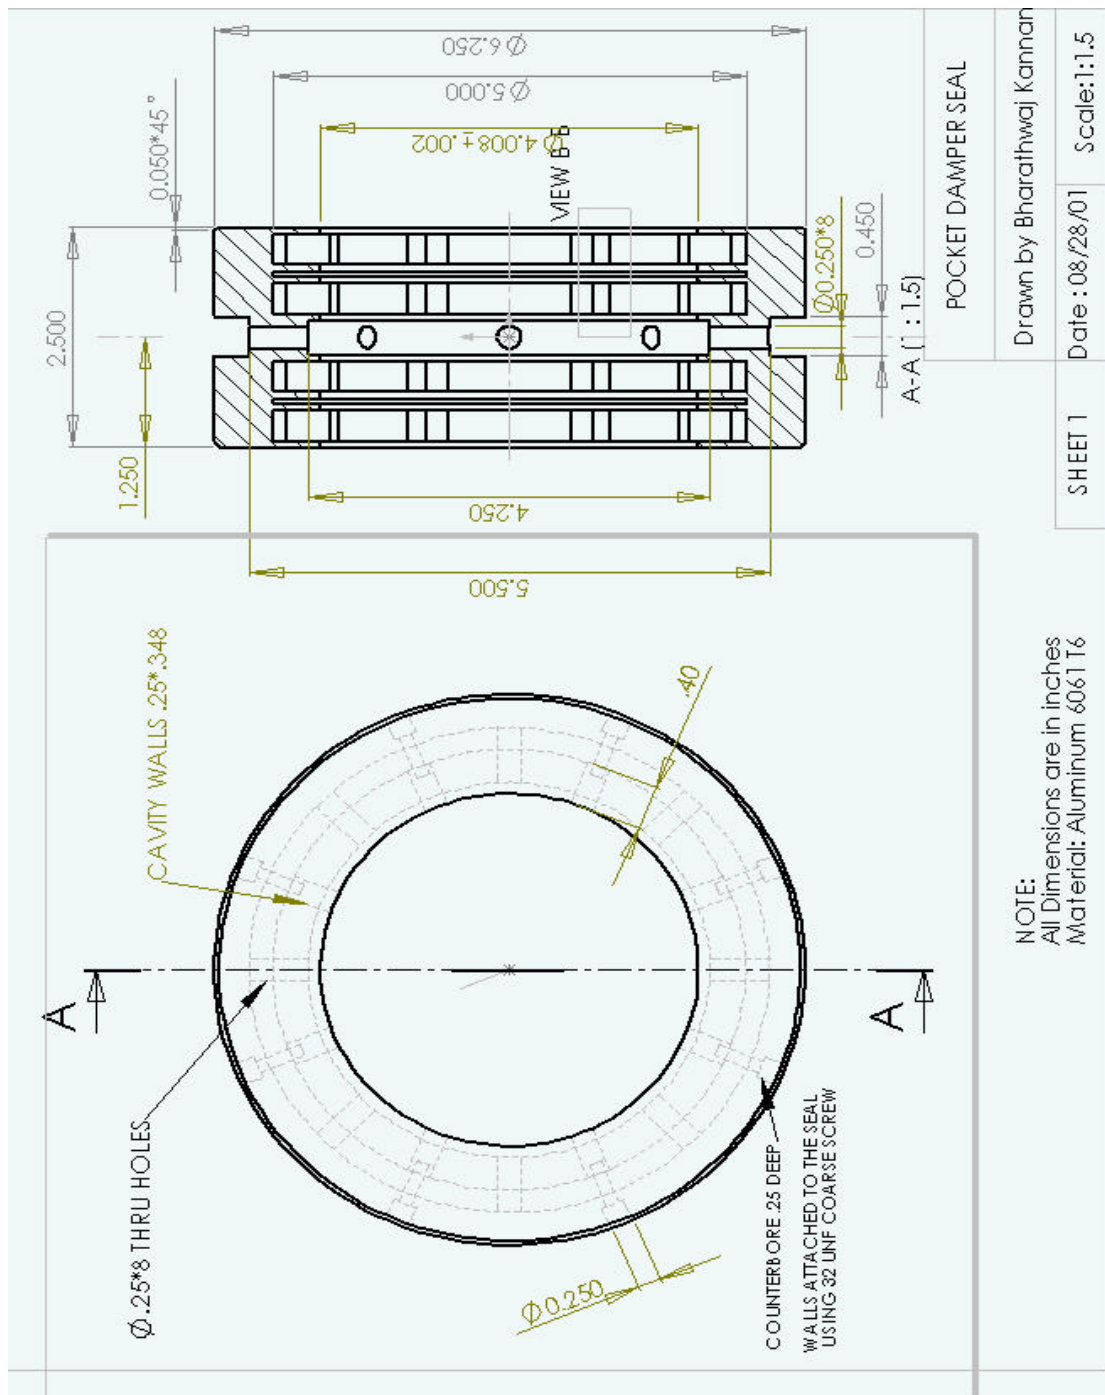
Detailed drawing of the PDS used in the rotating tests (Sheet I)
